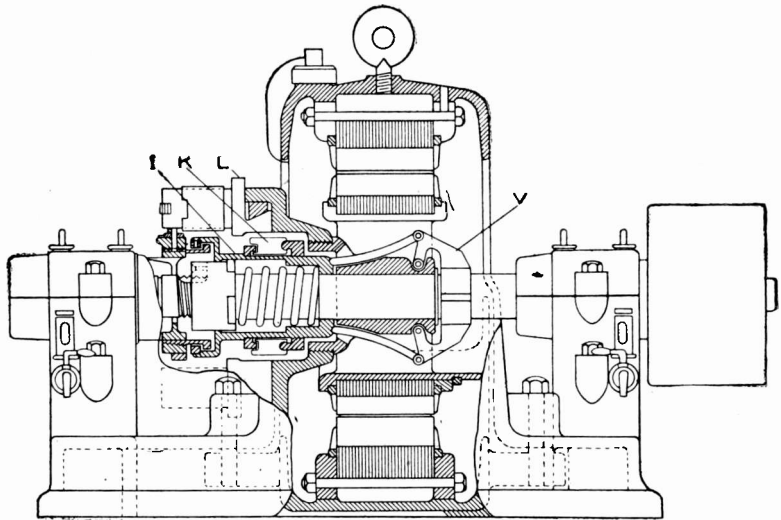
Part Section of Wagner Single-Phase Induction Motor
